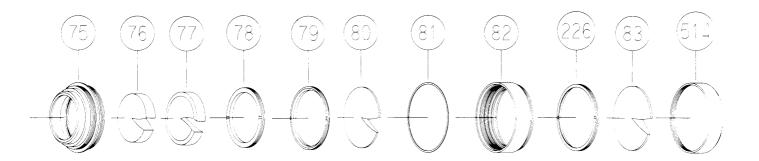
Fourth Lens Group Assembly (Ref. 506)
